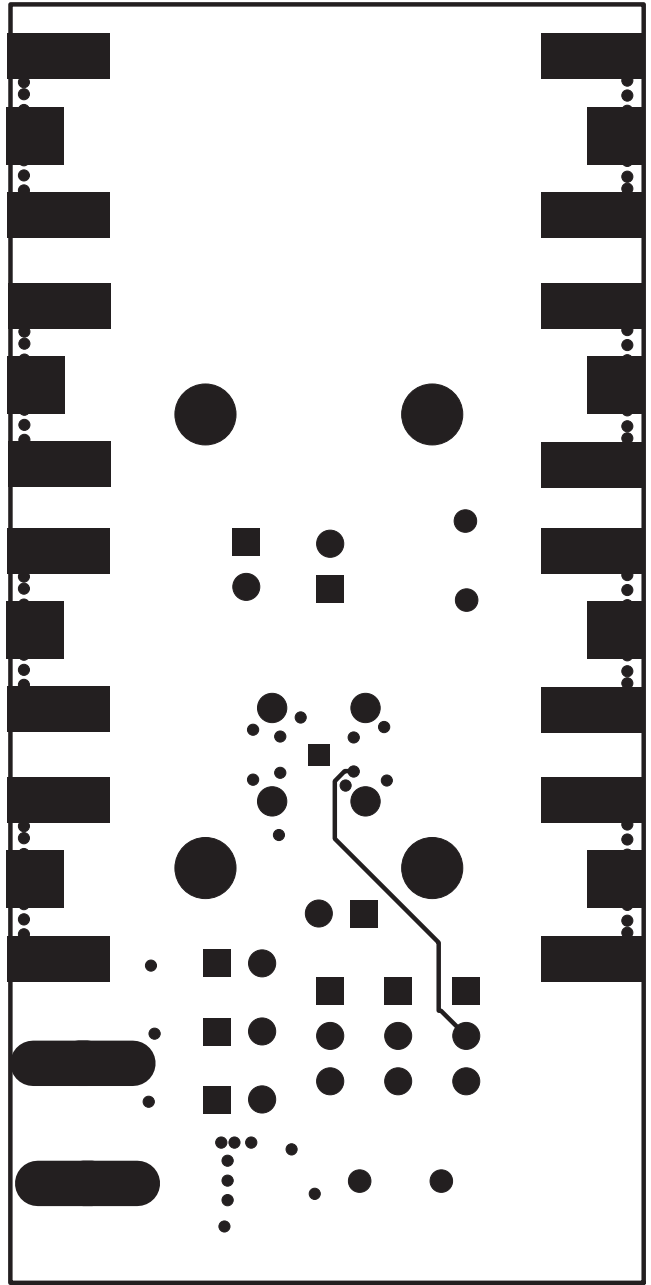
MAX3748H EV Kit PCB Layout—Solder Side (2X)
